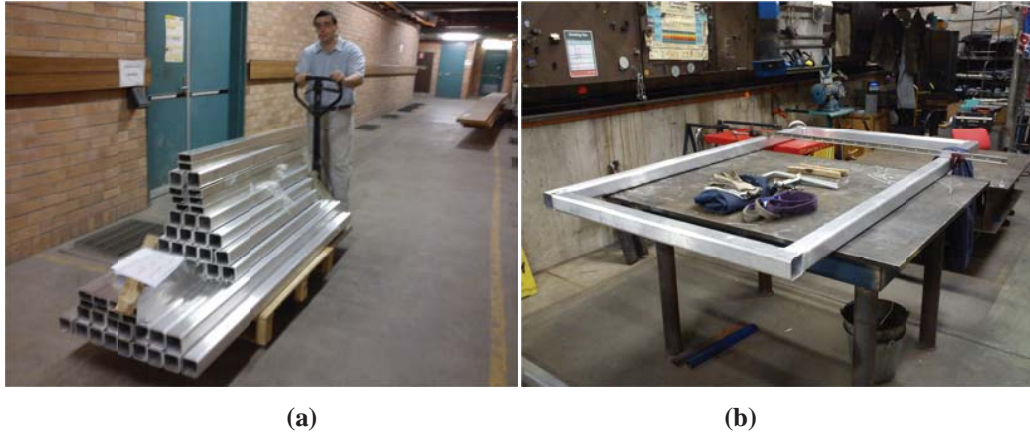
(a) Cut and drilled aluminium sections; (b) ready to use welded rectangular aluminium frames
